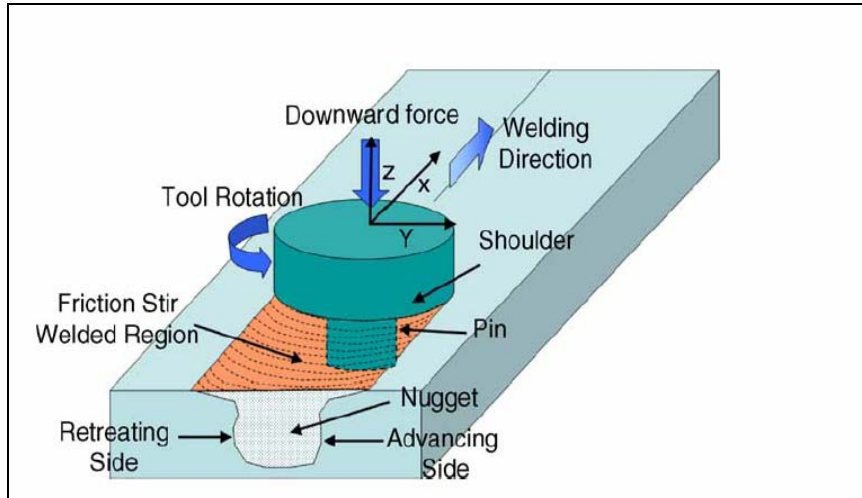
Schematic drawing of friction stir welding [4]
